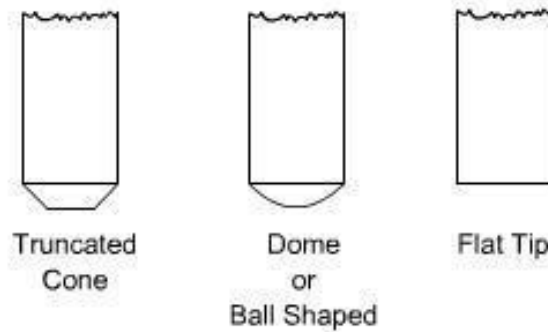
Electrode Shapes for Spot Welding
